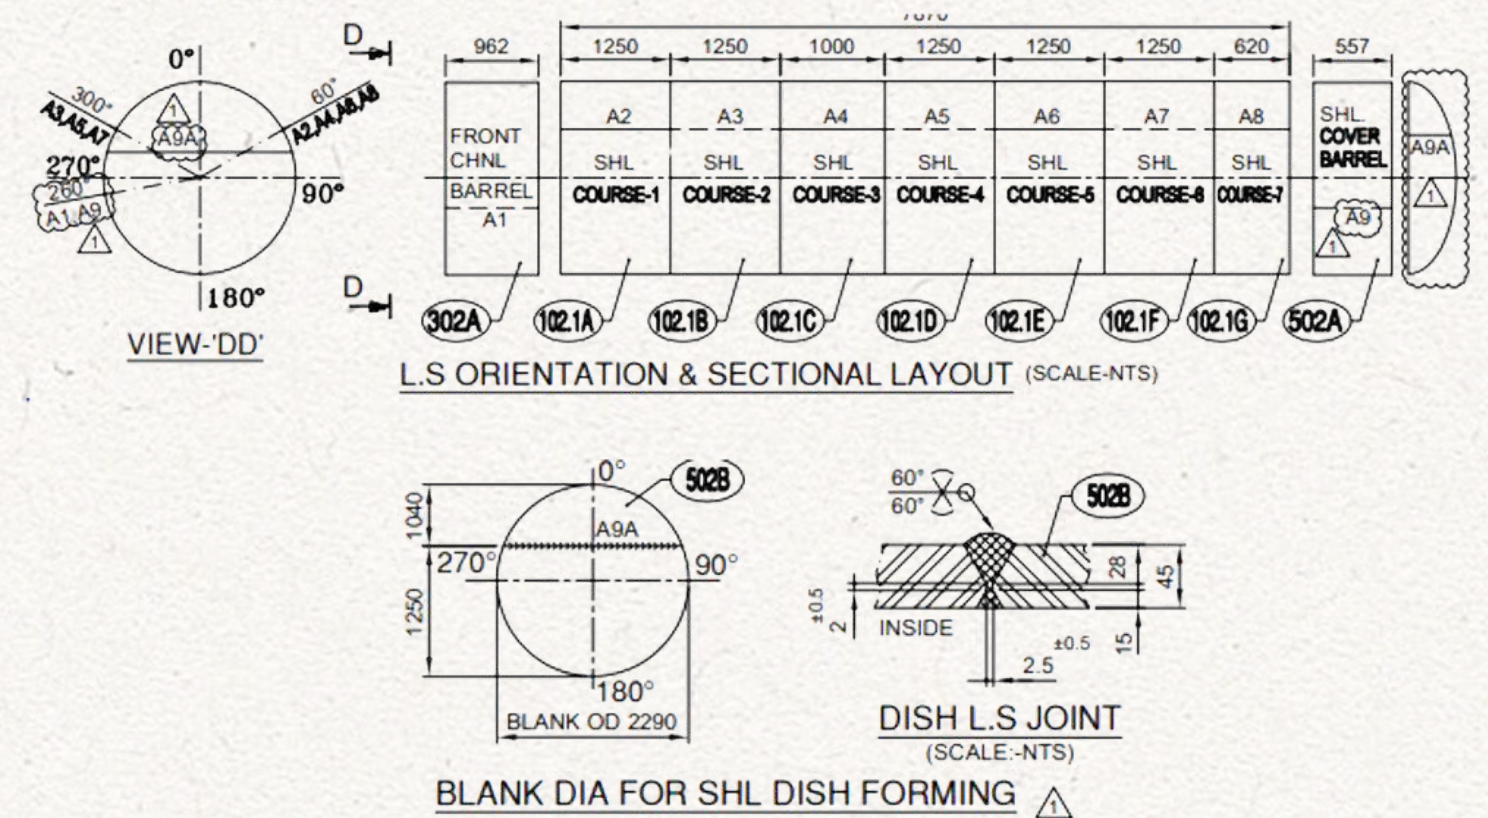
Sectional Layout & weld details of Shell cover dish L.S Joint
